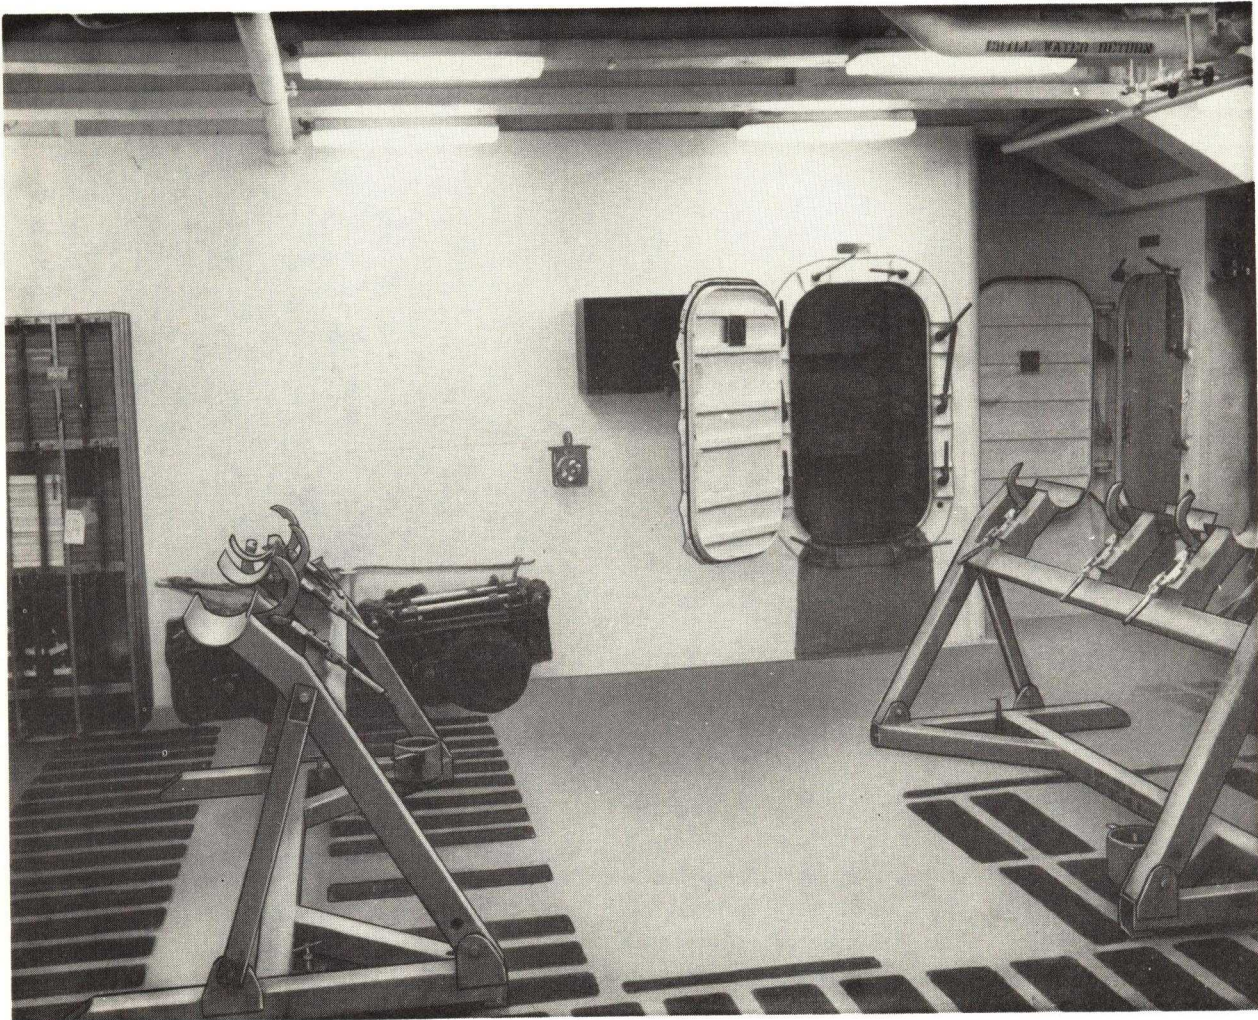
Typical Shipboard SIDEWINDER Assembly Area
